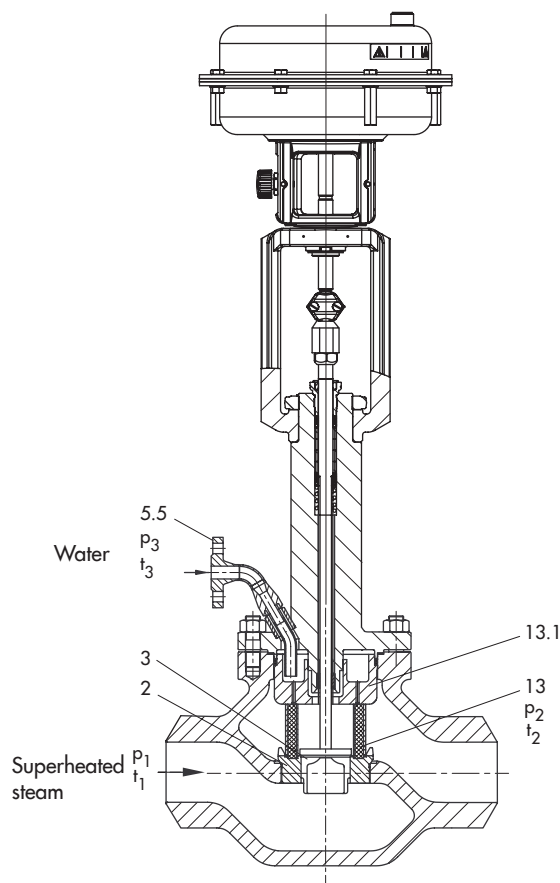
Type 3281-7 Pneumatic Steam Converter with insulating section, welding ends and Type 3277 Actuator
